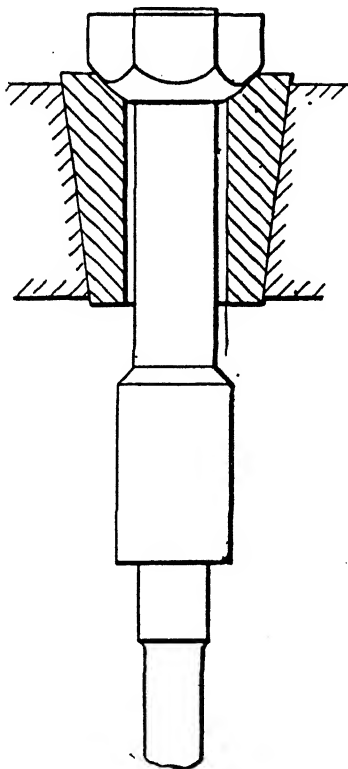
AN EXAMPLE OF SPHERICAL SEATING FOR TENSILE TEST-PIECE.
